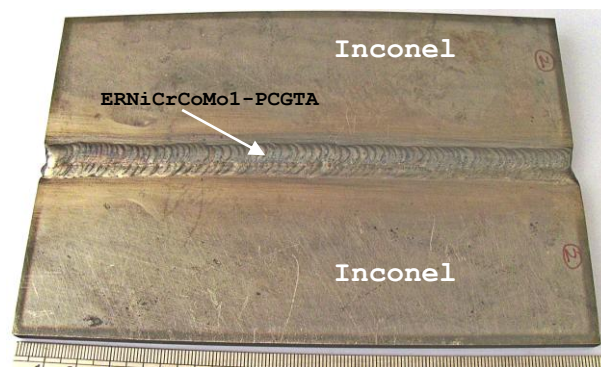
Photograph of Alloy 617 Weldment by PCGTA
